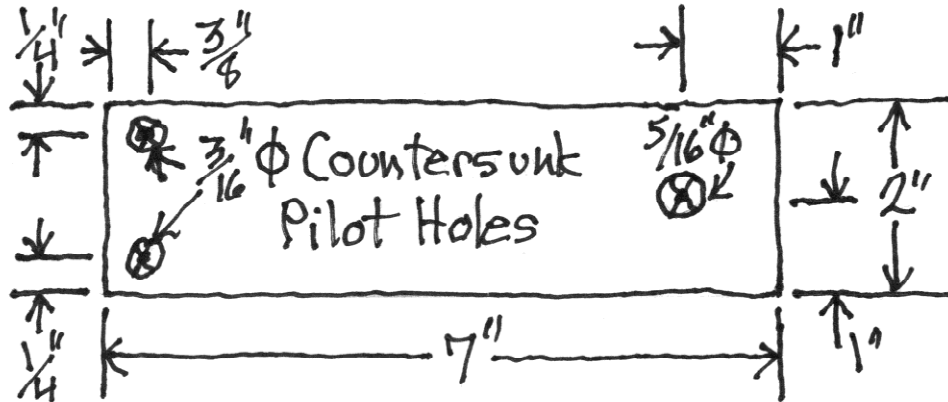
Size of the wood and the pattern for drilling the screw holes in two of the pieces of wood that make the yoke.
